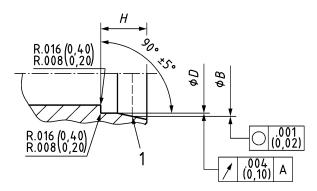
Configuration, dimensions and tolerances of fitting end design, style E (same as style G except as shown)
